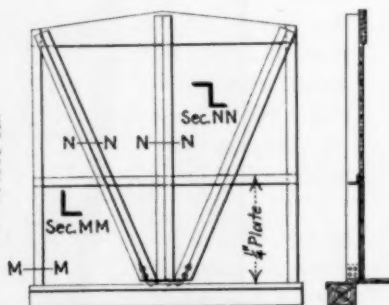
STEEL END FRAMING, M. C. B. RECOMMENDED DESIGN WITH SINGLE Z-BAR CENTER POST; DIAGONAL BRACES RUN FROM END SILL AT CENTER TO END PLATE AND 1/4-IN. END REINFORCING PLATE AT BOTTOM
